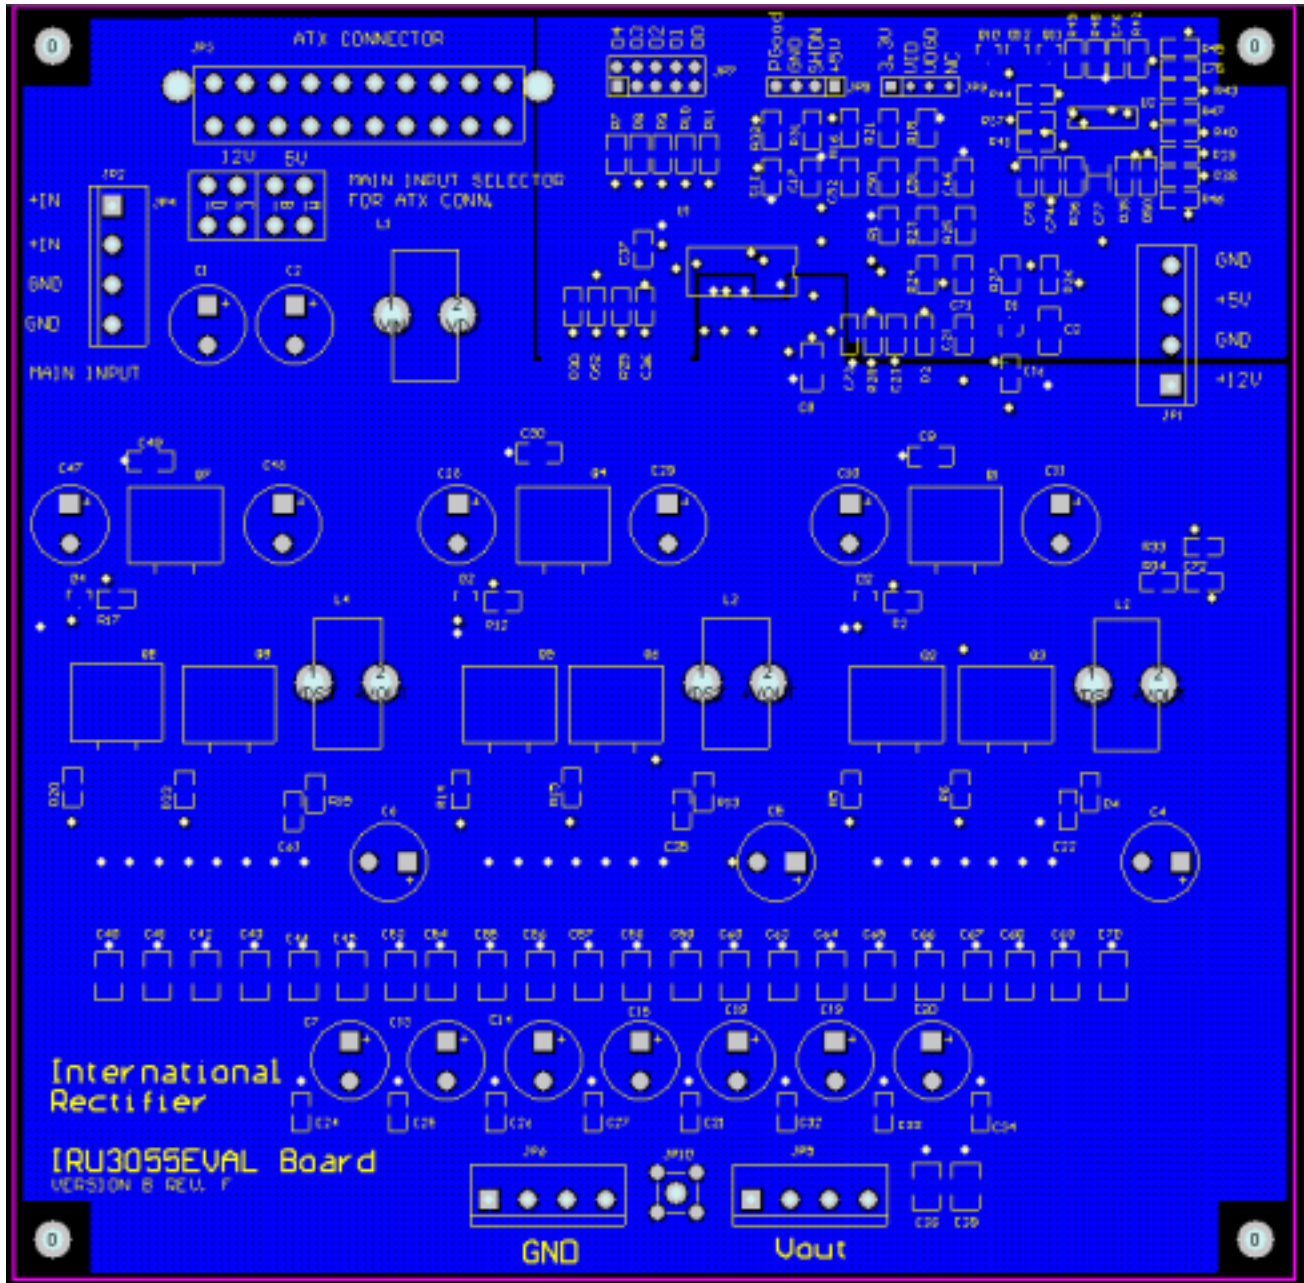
The bottom layer of IRU3055 demo-board PCB layout.
